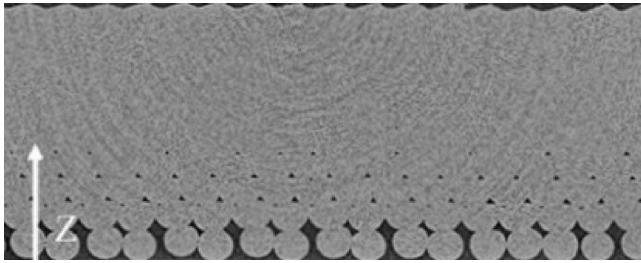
Cross-section of a specimen printed on an insufficiently leveled bed.
